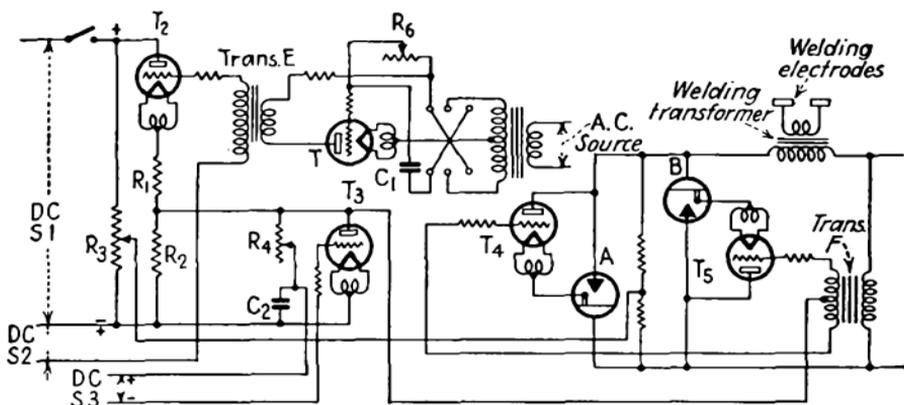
Circuit diagram of ignitron timer for spot welding.
